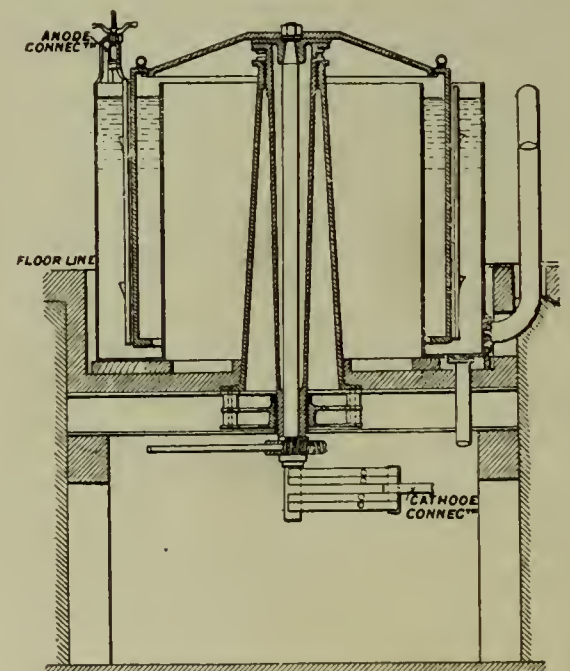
CROSS-SECTION OF MACHINE FOR DEPOSITING COPPER FOR WIRE STRIP
